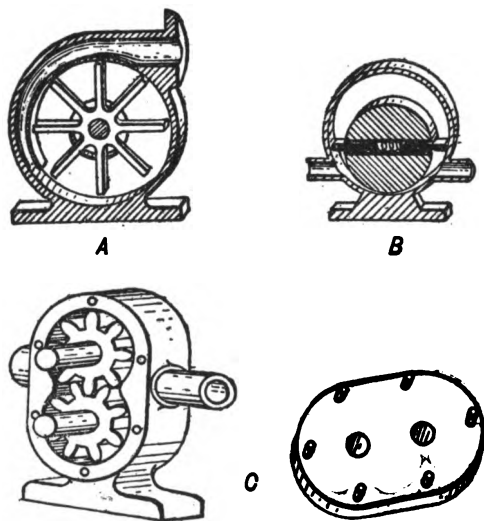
A, Centrifugal pump; B, vane pump; C, gear pump and cover.
